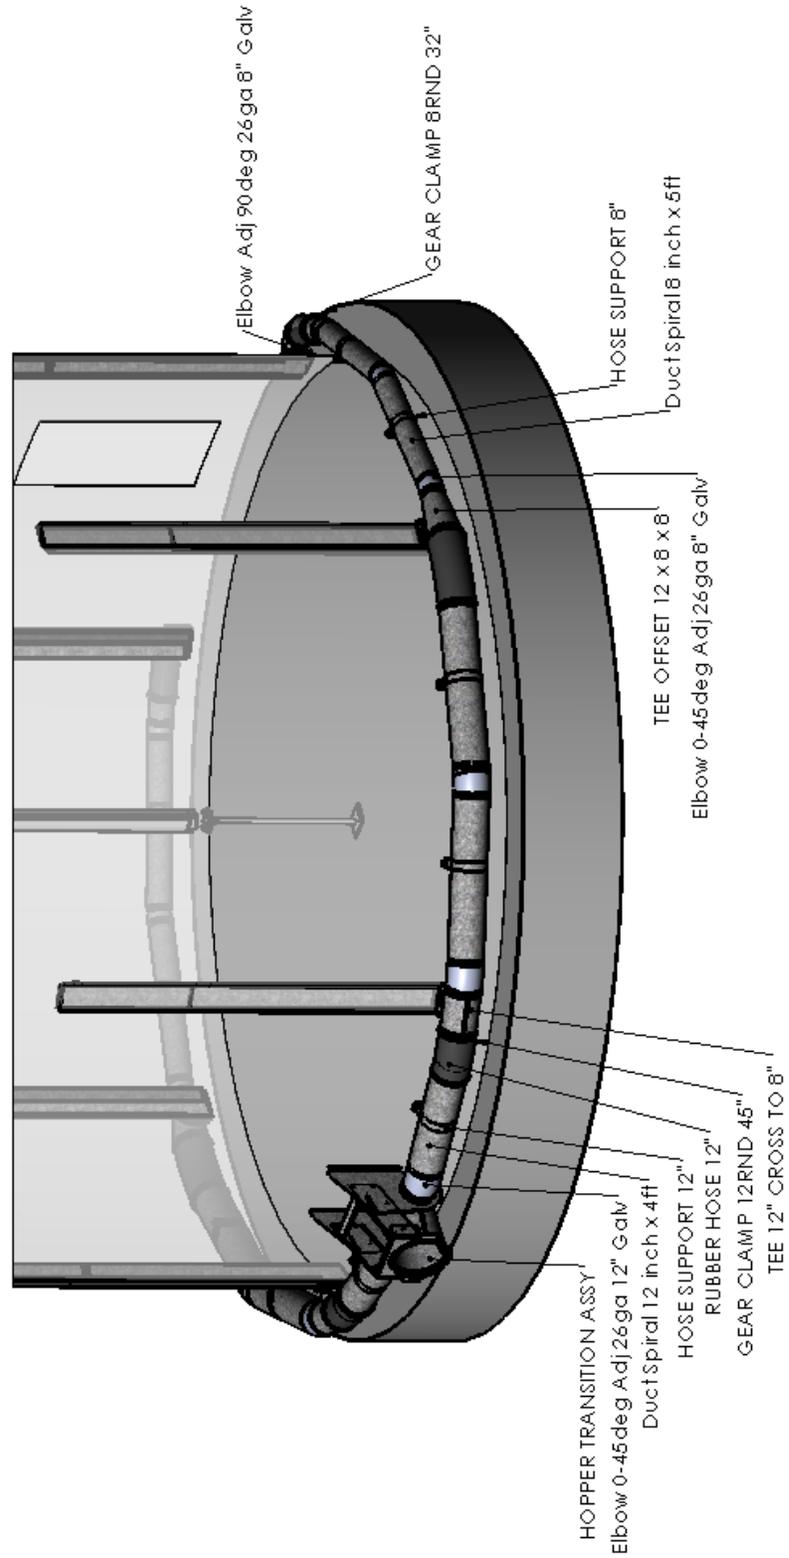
Flat Bottom Outside Ducting (6 vertical columns)
